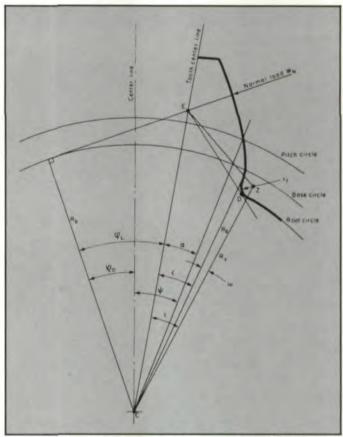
Geometrical relations in an involute spur gear tooth when the center of the root fillet radius is below the base circle
